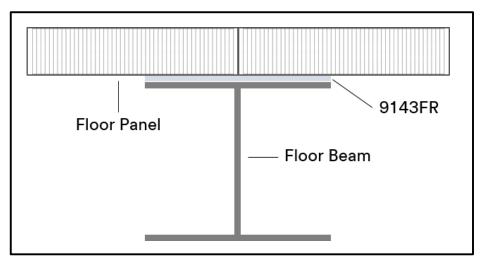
3M™ Corrosion Prevention Sealing Tape 9143FR and Typical Aircraft Floor Panel Support Structure
